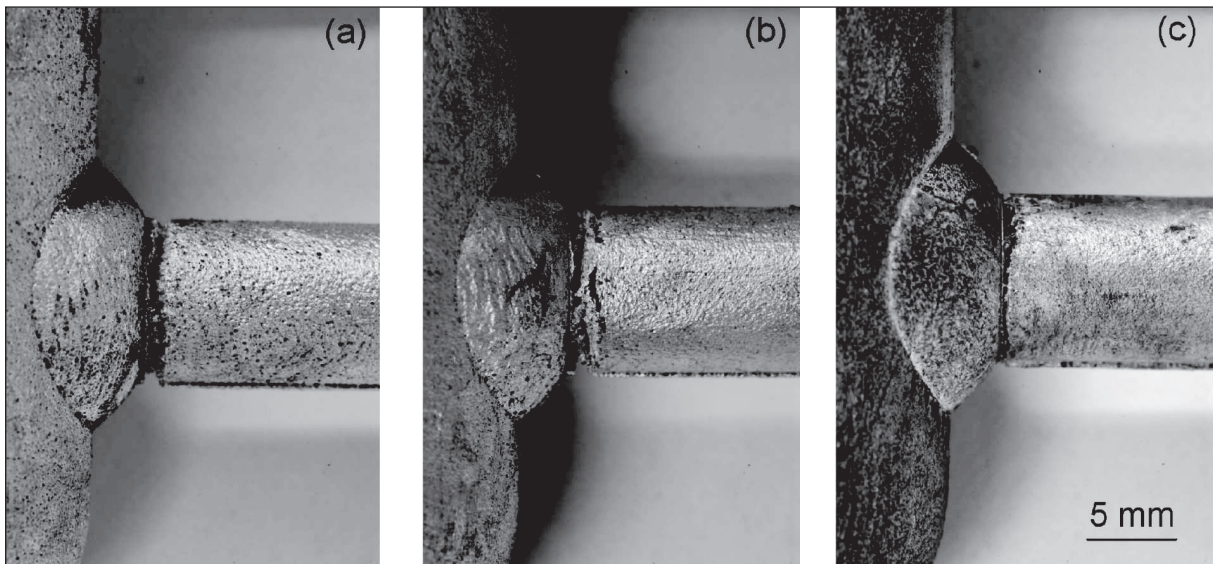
Close-up views of hot tears (cracks) in the bottom of rods near the sprue: (a) Mg-2%Al; (b) Mg-4%Al; (c) Mg-8%Al.
